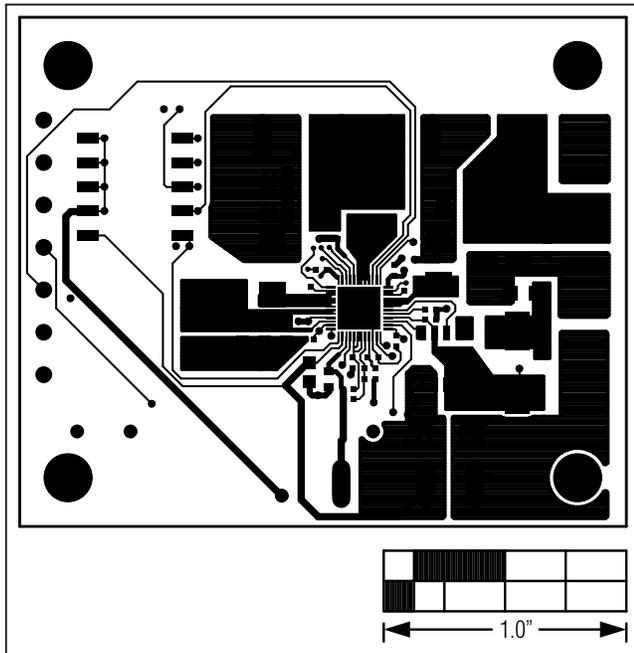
MAX17019N EV Kit PCB Layout—Component Side
